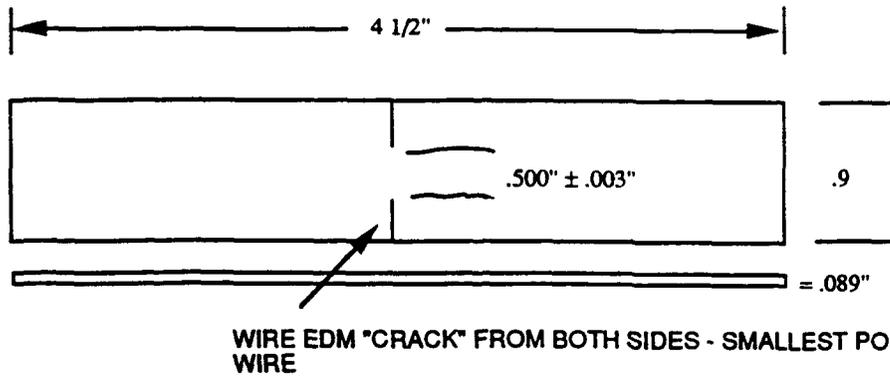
WIRE EDM CRACKED SPECIMEN USING .004-INCH DIAMETER WIRE (STRESS CONCENTRATION EQUALS 13)
